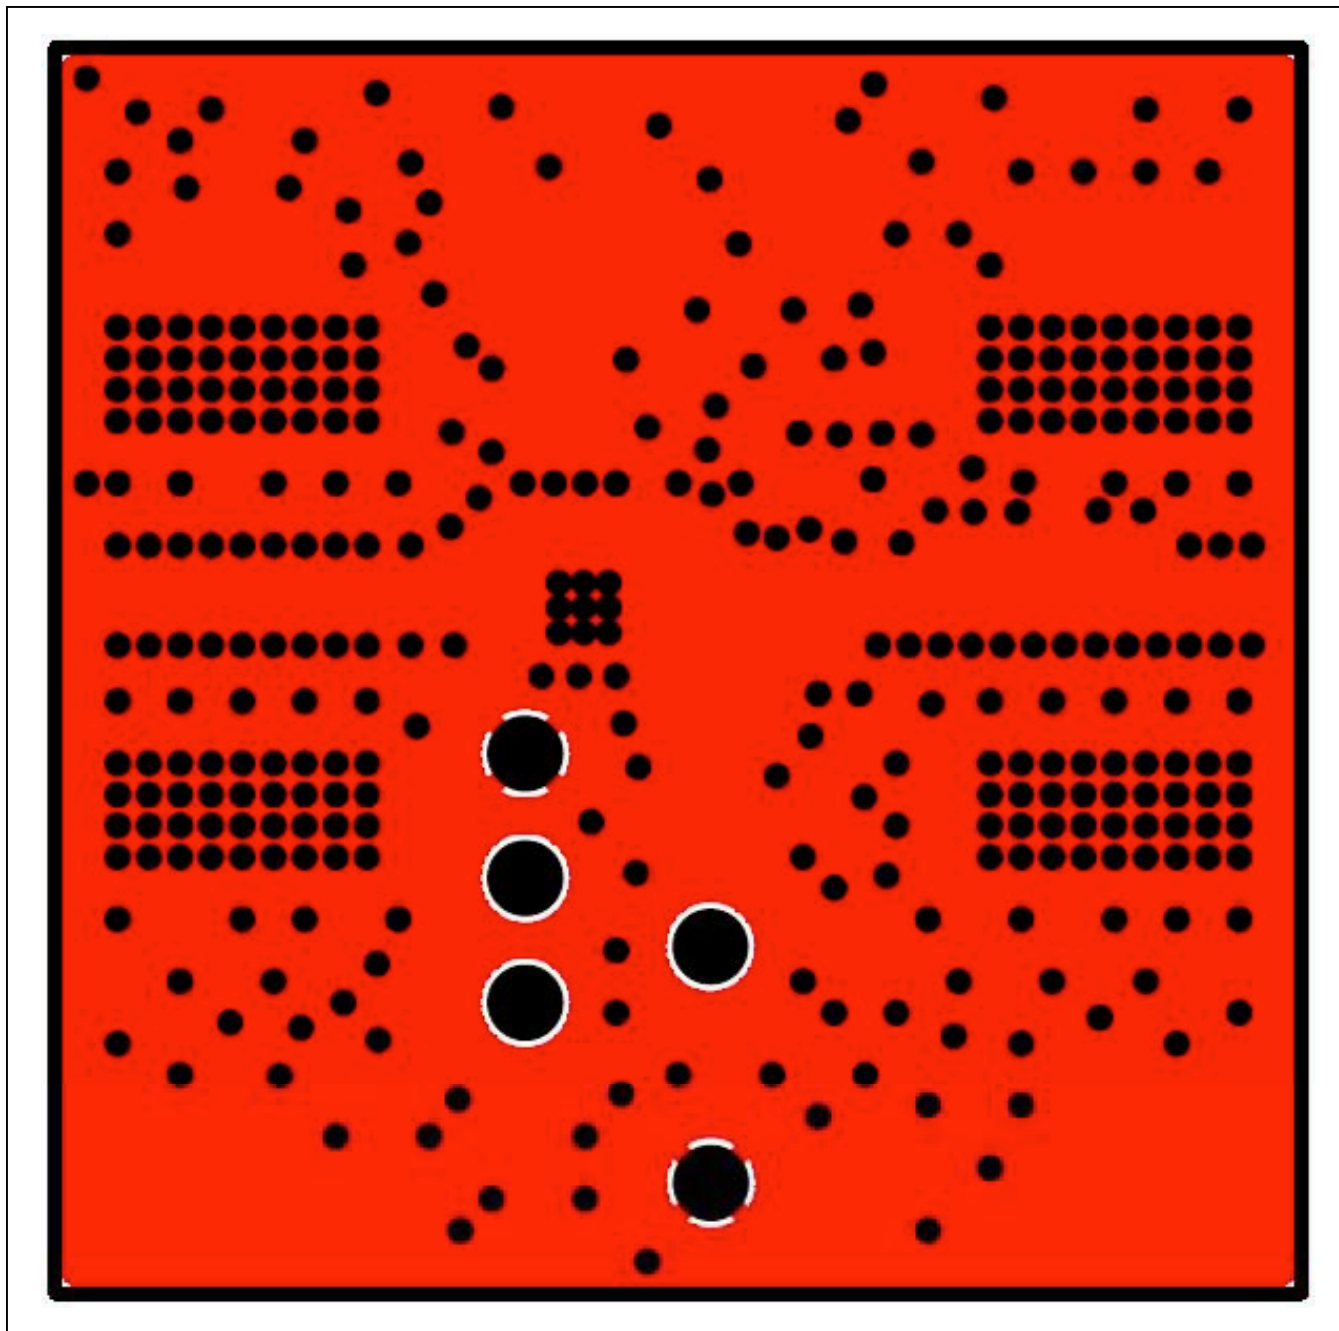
MAX2612–MAX2616 EV Kit PCB Layout—Layer 2
